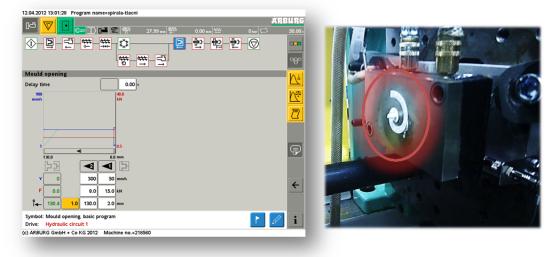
Mold closing setting screenshot and blocked piece on the mold
